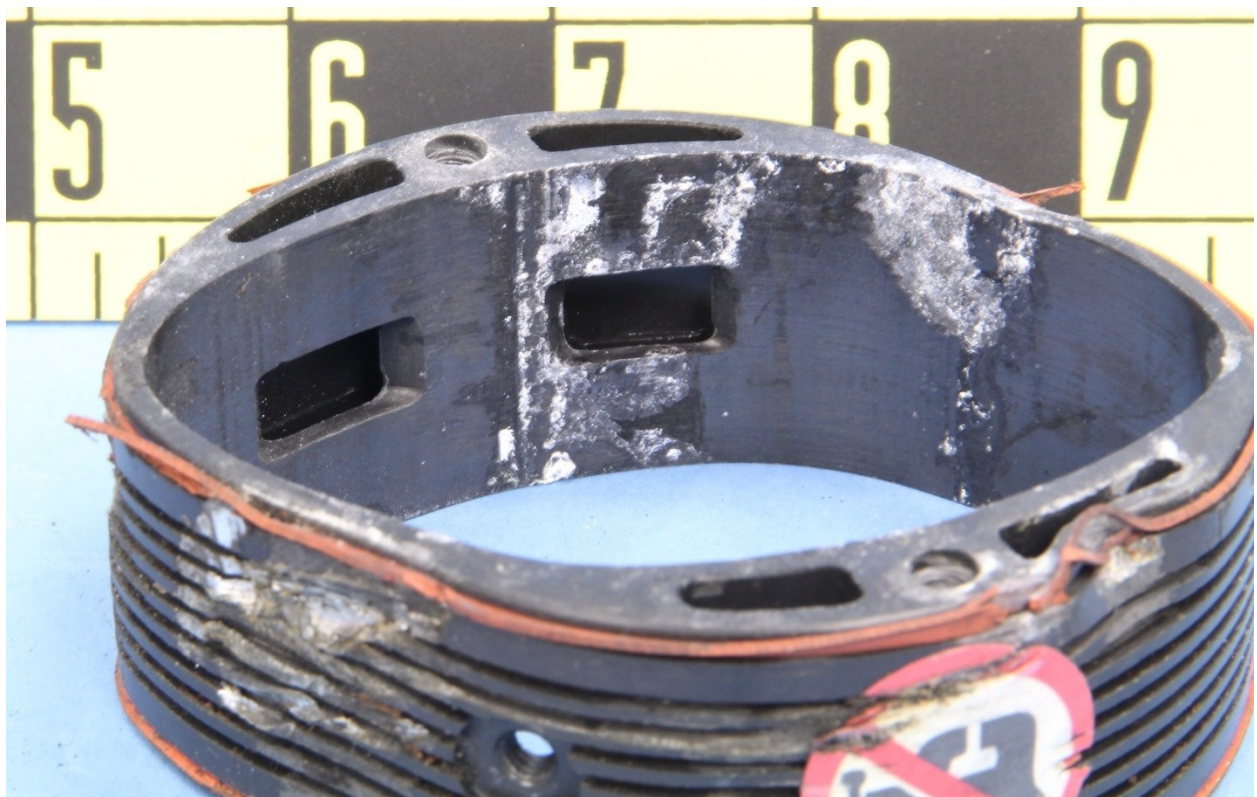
Interior view of the crushed pump housing, showing witness marks of the mating rotor piece, circumferential wear marks and gouging, and indications of dried residue from pooled fluid.
